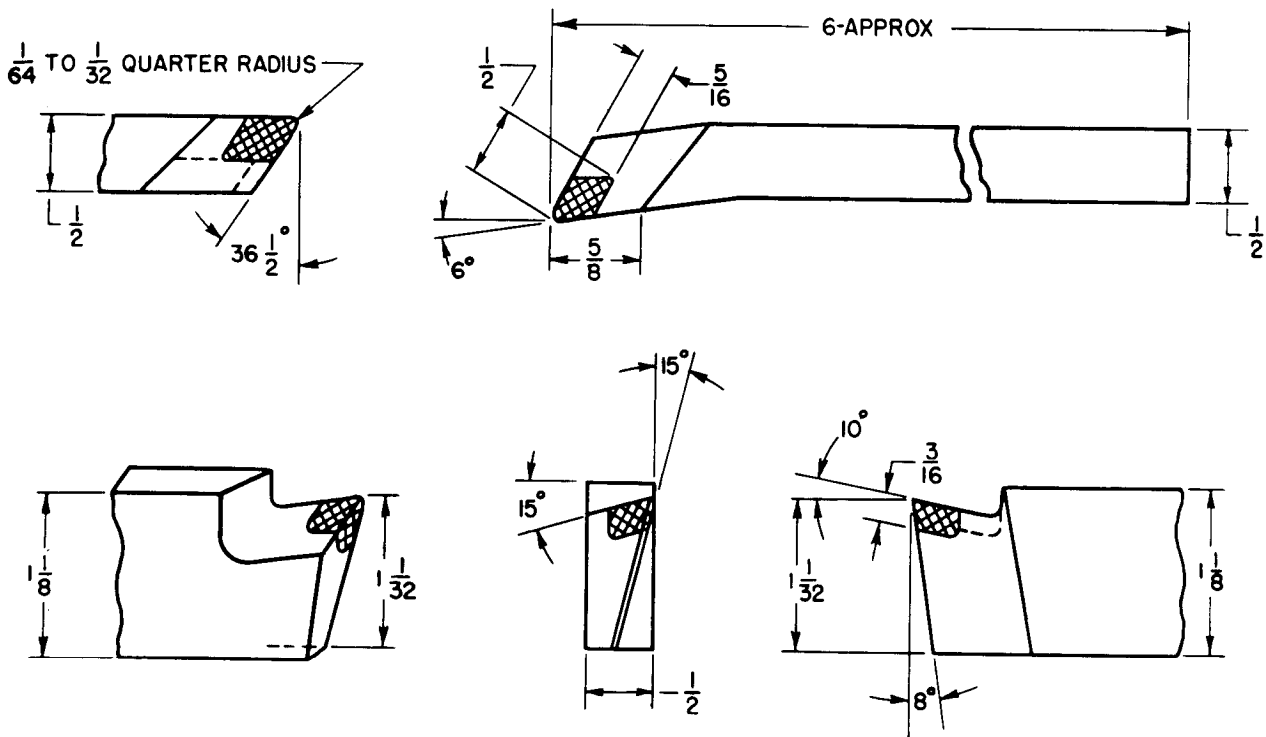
Fabrication of Carboly-tipped Cutting Tool.
